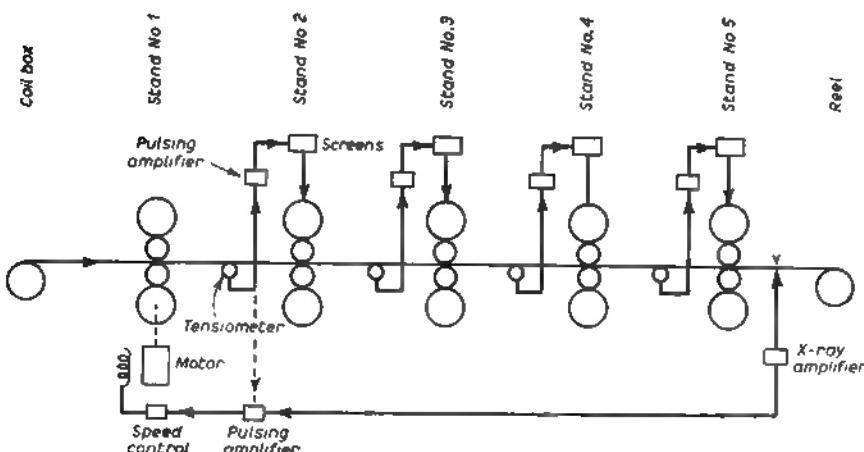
Schematic arrangement of auto-gauge/tension control on a 5-stand tinplate rolling mill
